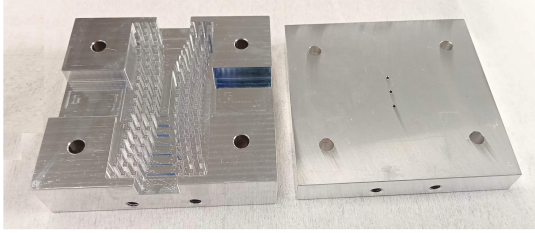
View of the manufactured transformer (body -left- and top -right-).
